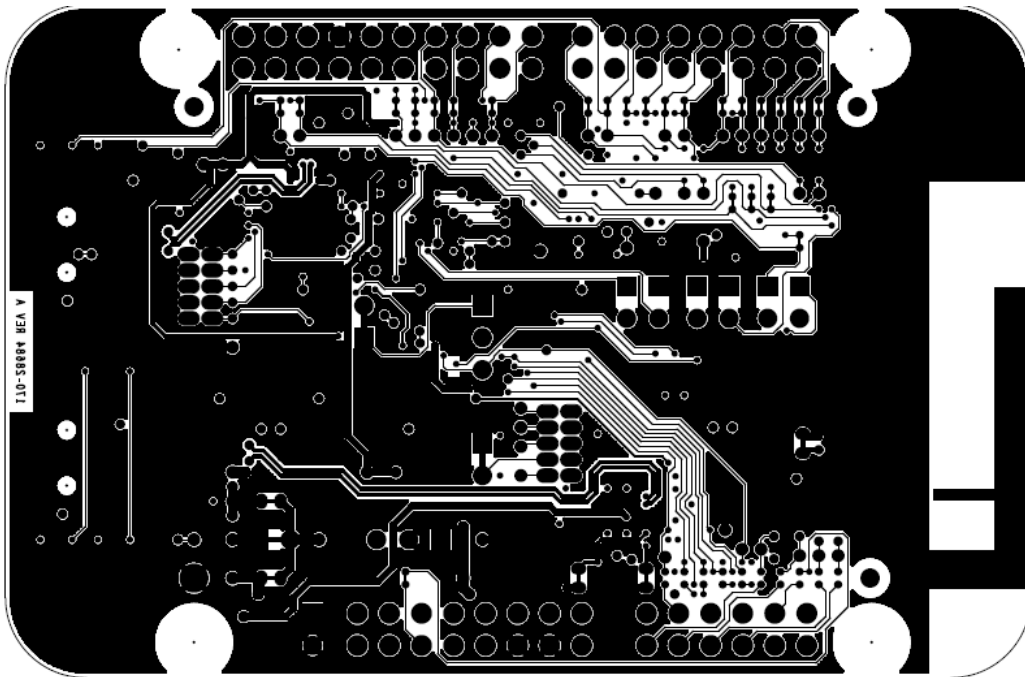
FRDM-KW24D512 development board layout (bottom view)
